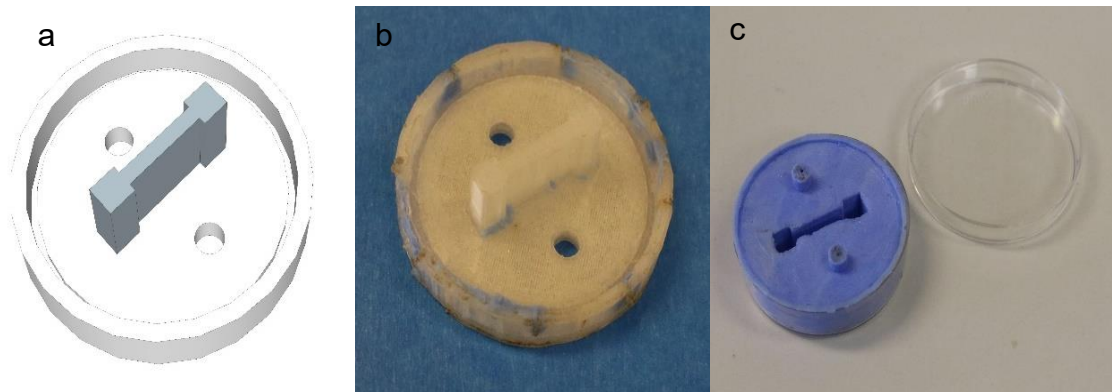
Original PLA mould design, 3D printed PLA mould and silicone cast. a) CAD design created in Google Sketch Up (64 bit) 2017 for the PLA mould. b) 3D printed PLA mould printed using Ultimaker 3 extended. c) Silicone cast created from the 3D printed PLA mould. Results representative of the production of 5 silicone casts.
